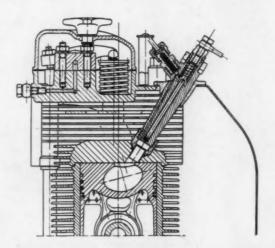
Combustion chamber of aircooled diesel engine with direct fuel injection (K) type AKD 12.
